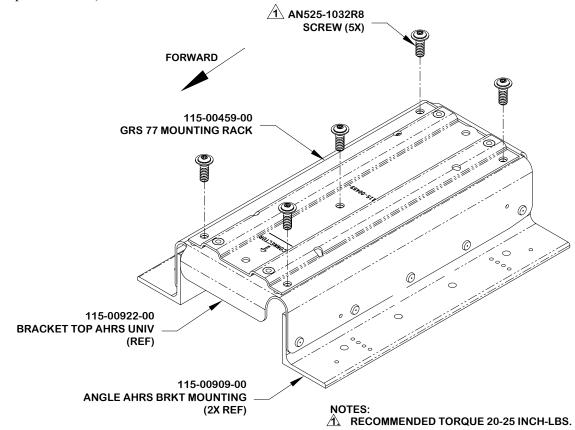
Assembling GRS 77H Mounting Rack to GRS 77H Universal Mount
